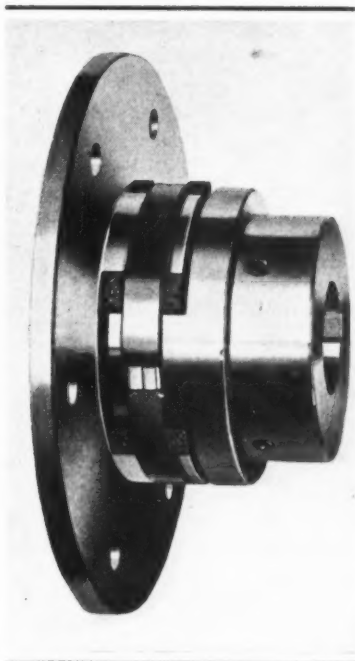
A Crane, Quill Feeding Mechanism, and Quick-change Adapter can be Provided for the Universal Milling Attachment
